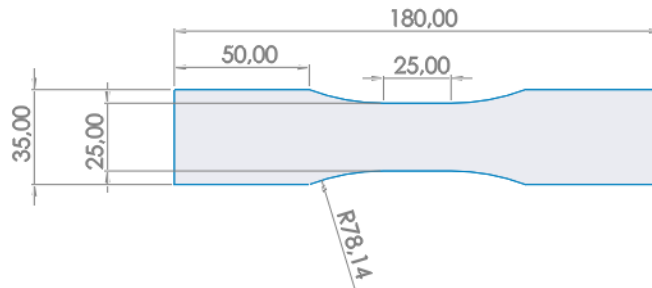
Specimen for fatigue testing (dimensions in millimeters).
